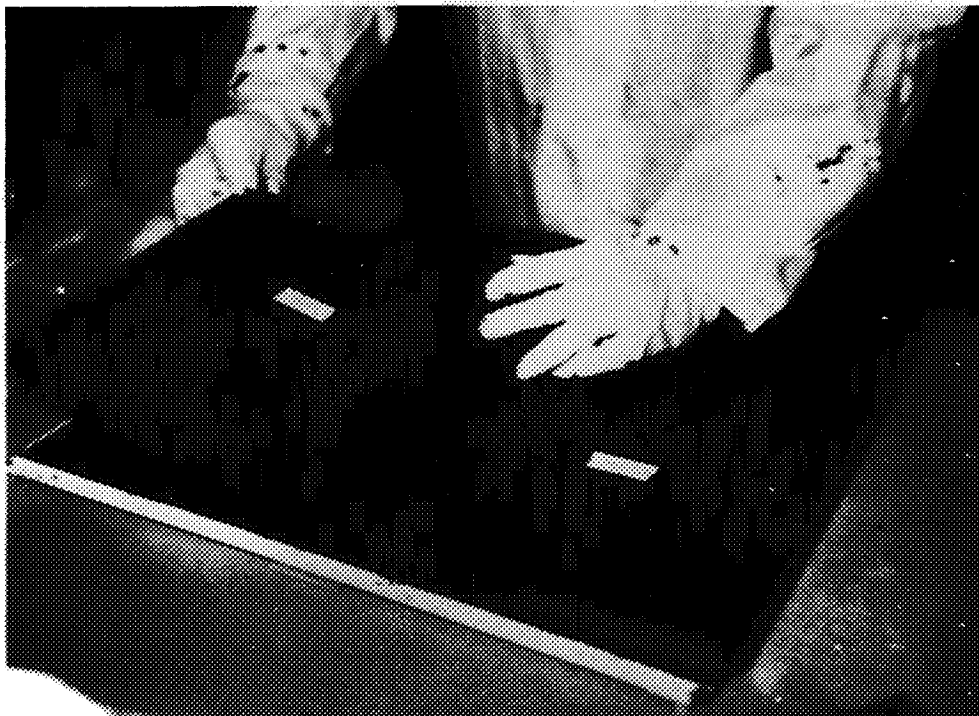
BONDING TILES (64T020004 ASSEMBLY)
